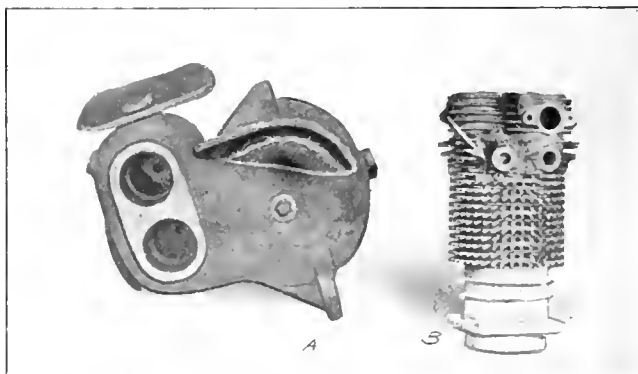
Cylinder Cracked in Inner Wall, showing Large Section of Outer Wall removed to weld the Crack.
